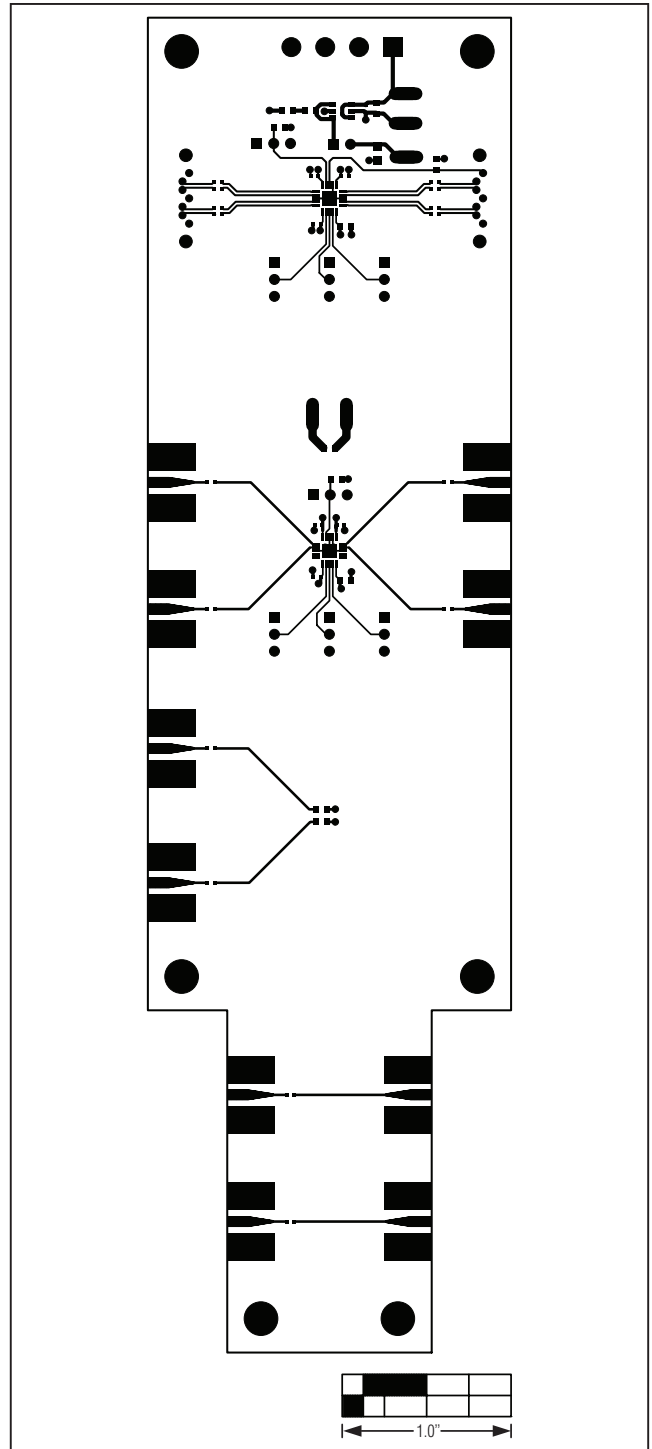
MAX4951AE EV Kit PCB Layout—Component Side
